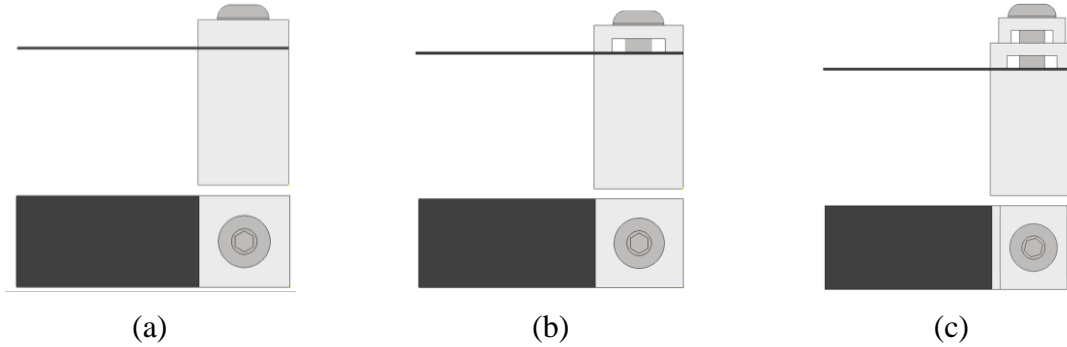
PEH fastening methods using conventional clamping plates (a), alternative clamping plates using a single clamp (b), and double clamps (c) [140].
